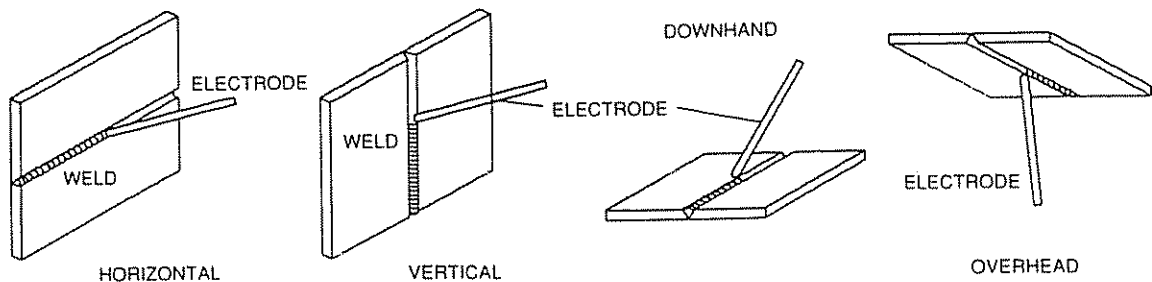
Manual shielded metal arc welding positions.
